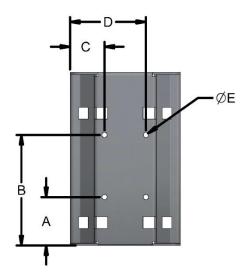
Heavy Duty Mounting Bracket Bolt Pattern
